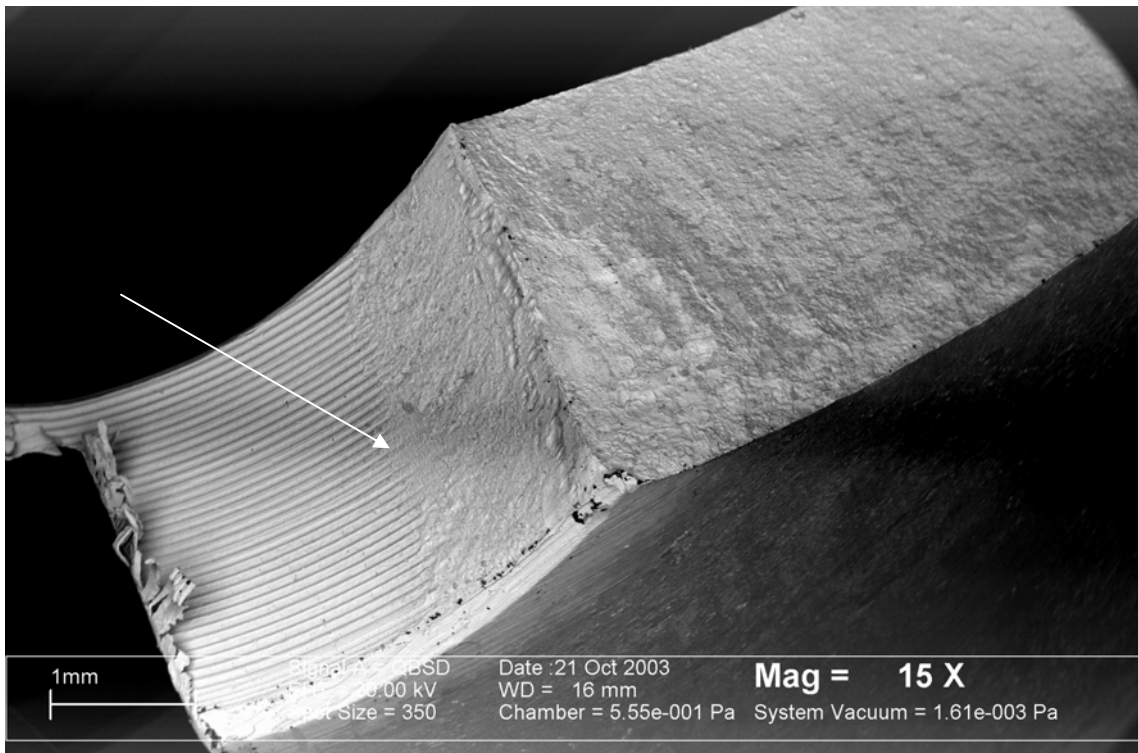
A scanning electron microscope view of the area shown in figure 12. Note how the machining of the bolt hole was disrupted by the fretting damage (arrowed).
